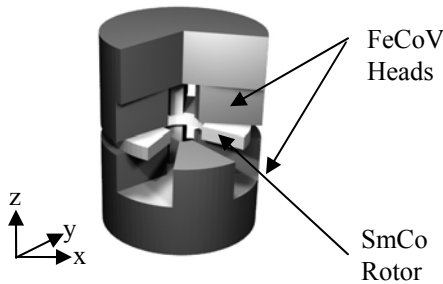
Cutaway view of the magnetizing fixture used for patterning poles on permanent magnet rotors.
